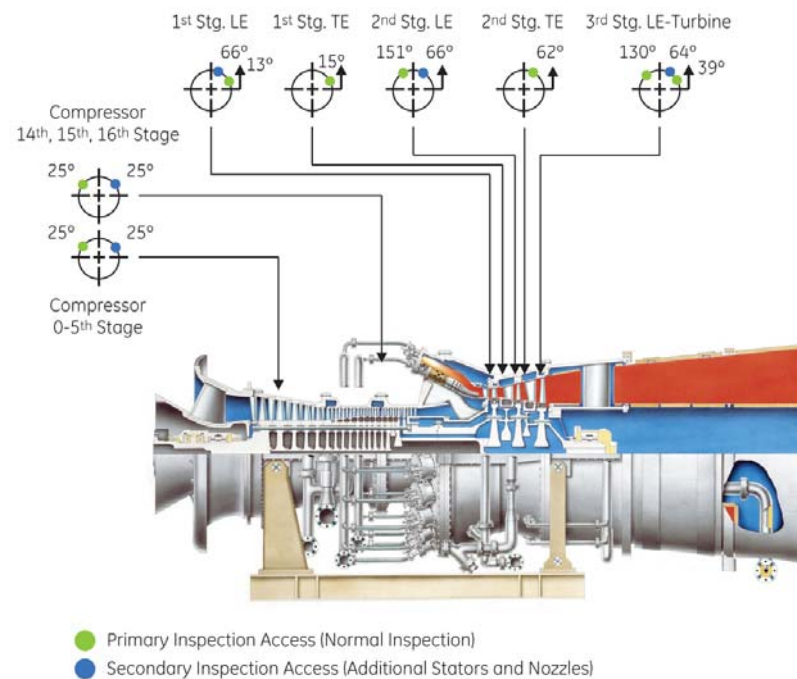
Borescope inspection access locations for 7/9F machines
